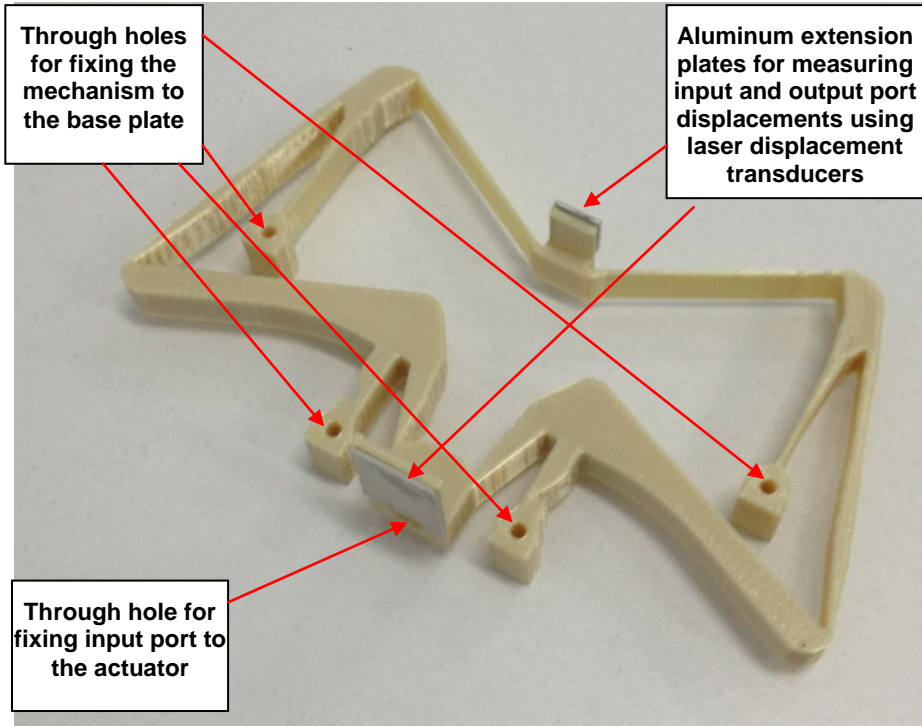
Prototype compliant mechanism manufactured using fast prototyping using ULTEM 9085 as fast prototyping material
